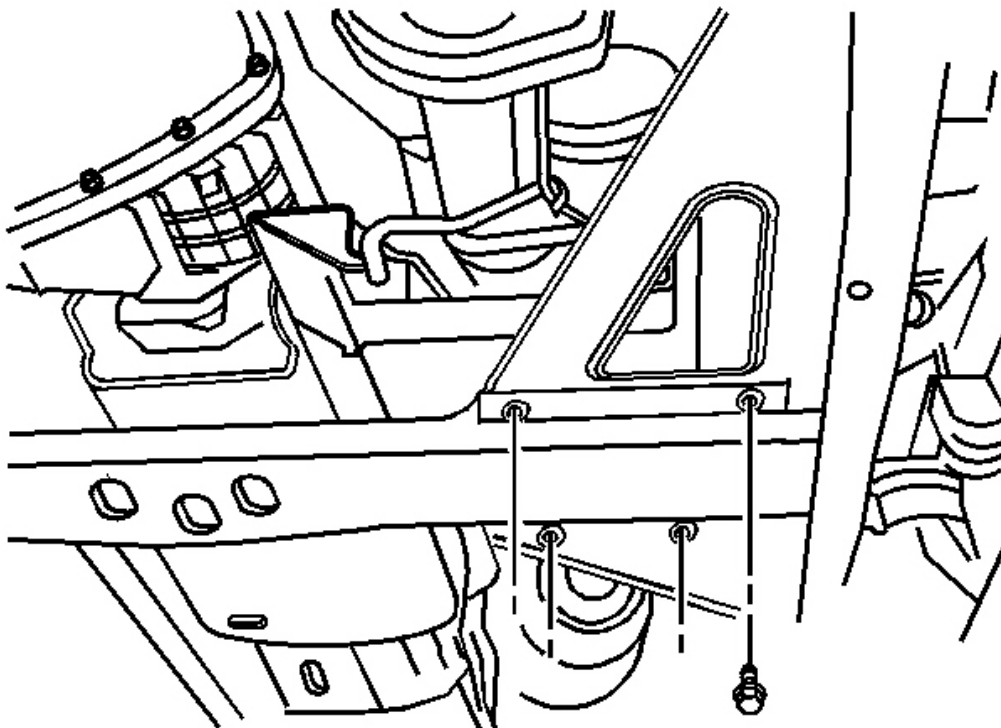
View of Upper Transmission Support to Frame Mounting Bolts
